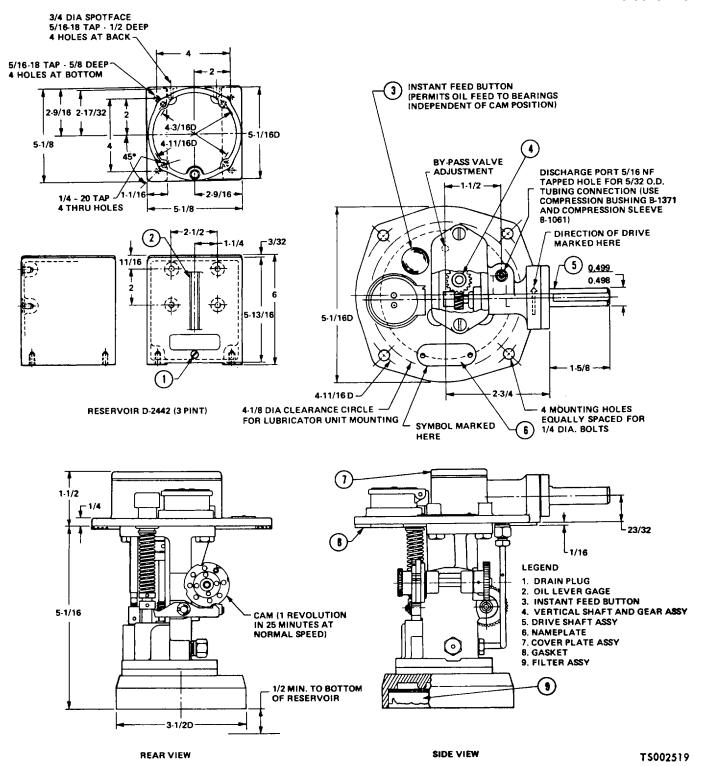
Oil reservoir and internal view of lubricator unit.
